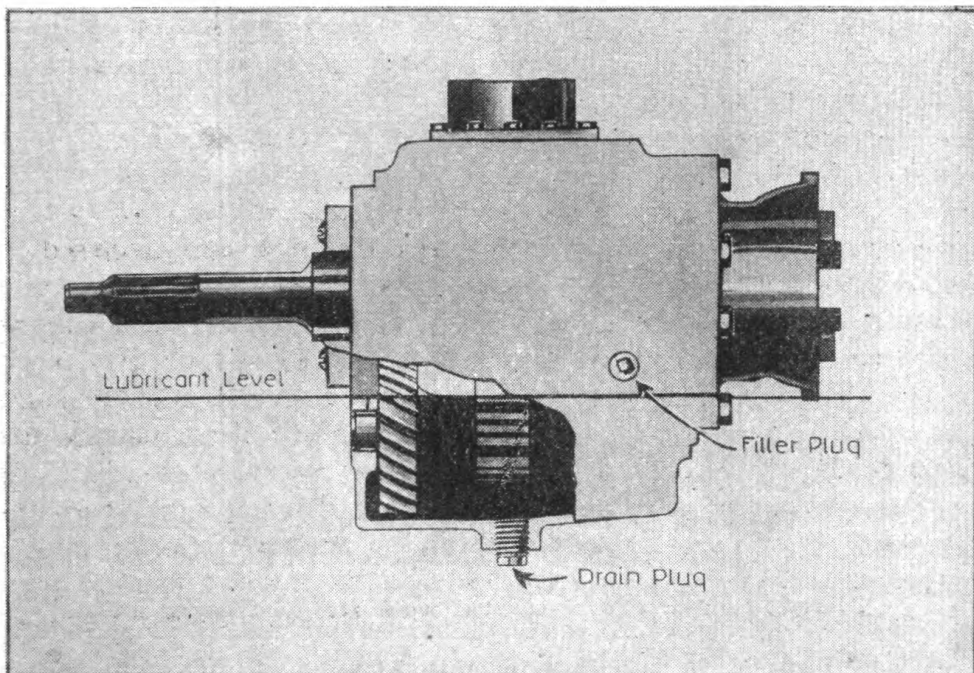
Oil level in transmission gear case (proper level, about $\frac{1}{2}$ inch below filler plug, indicated by black line).
